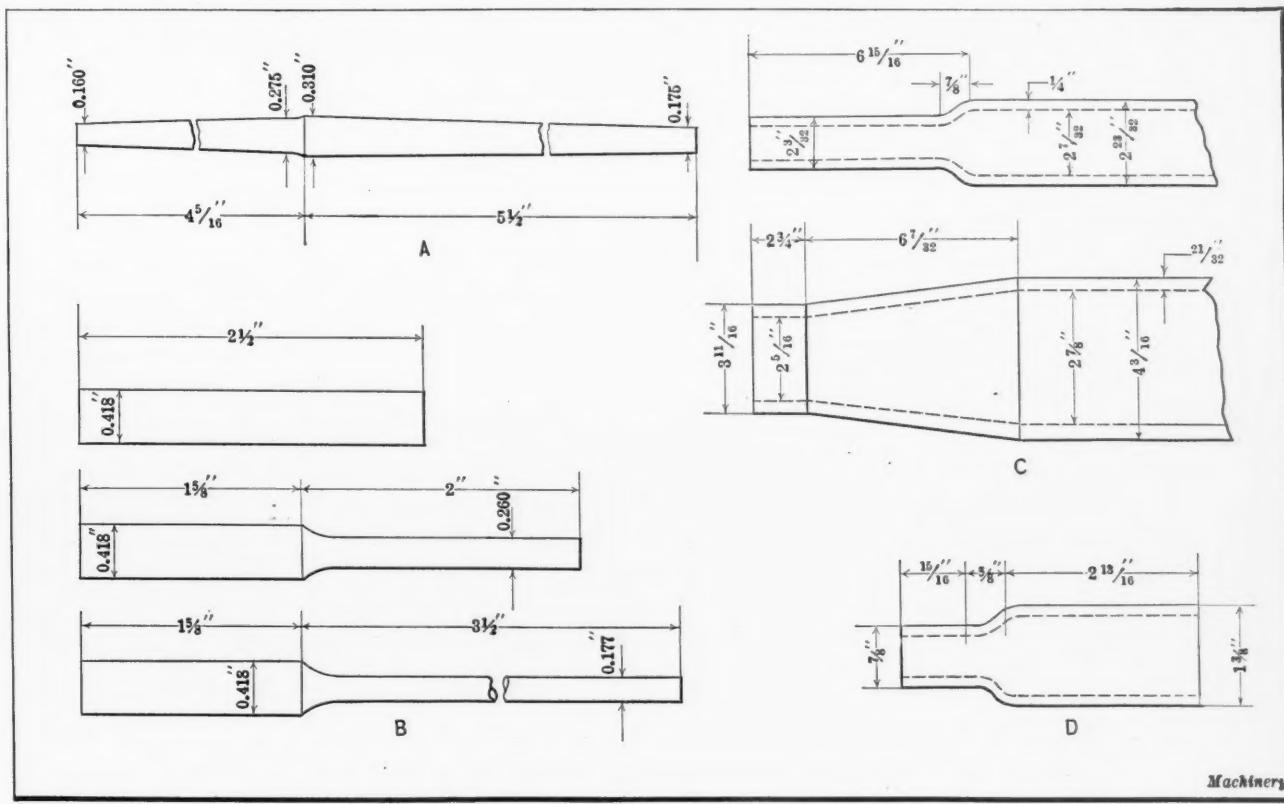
Examples of Hot-swaged Solid and Tubular Work
